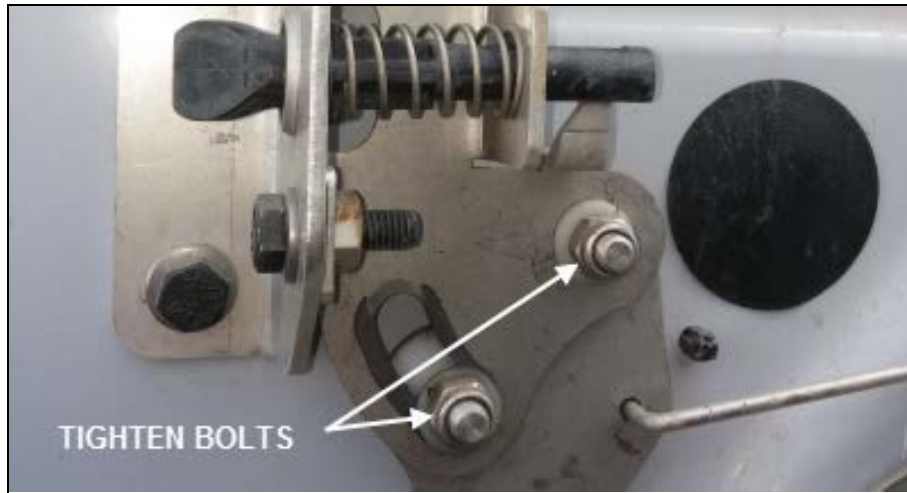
FINAL TIGHTENING OF ARM BOLTS
